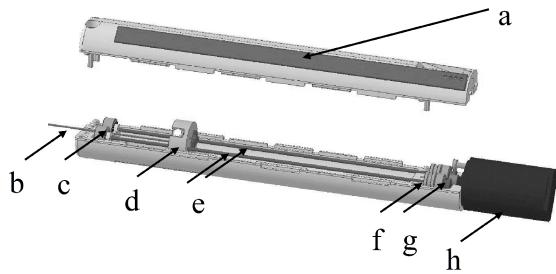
The actuators. a. PCB for Hall sensors, b. Steel cable, c. Bearings, d. Nut, e. Threaded bars, f. Bearings, g. Gearings, h. Motor
